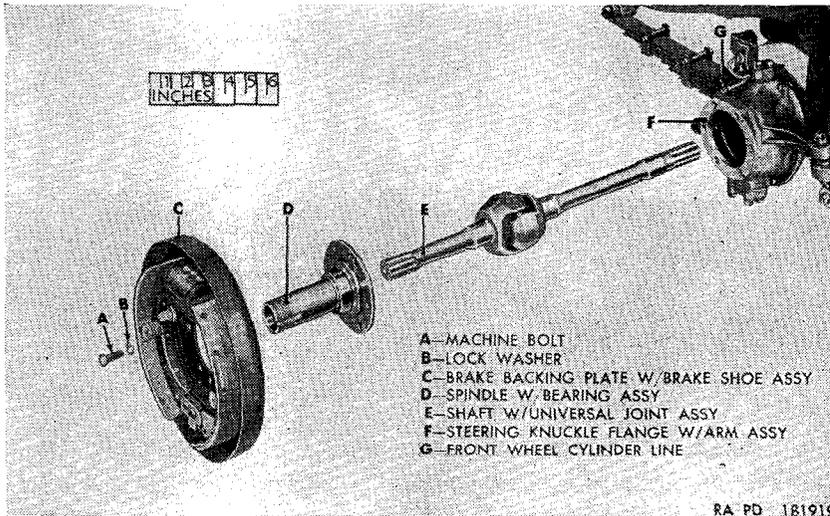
Shaft with universal joint, spindle with bearing, and brake backing plate with brake shoe assemblies—partially exploded view.
